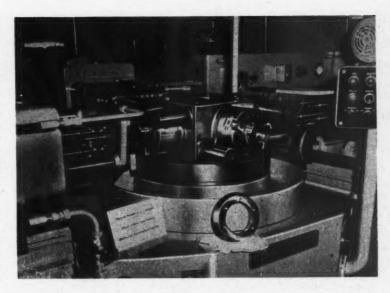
Close-up view of a Bammesberger 3-head special-purpose machine for drilling, reaming, and tapping operations on blanks for bevel gears
